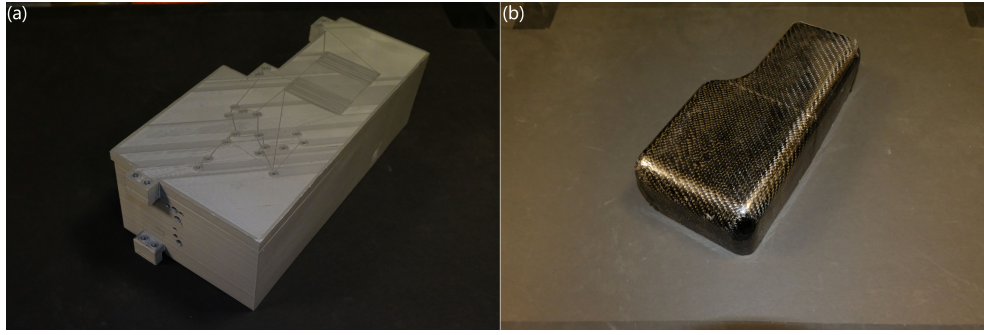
(a) 3D printed casing in PLA, (b) Prototype single piece carbon fibre case
